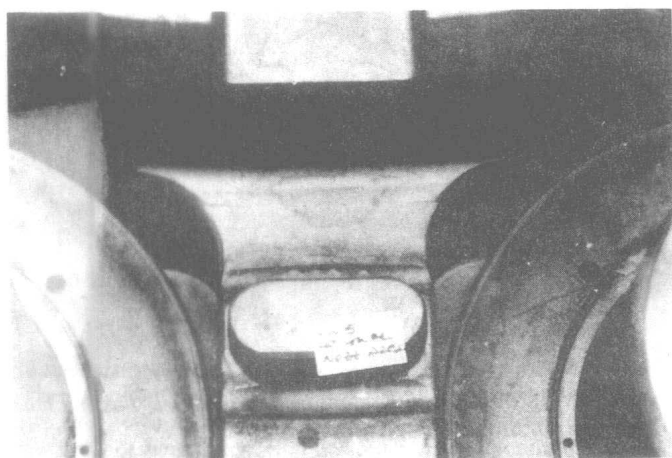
View of Internal Surfaces of Turbine Shell Casting Illustrating Multiple Cracking at Internal Radii.
